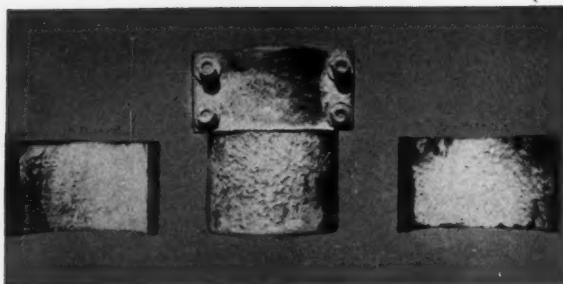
Dust between wearing surfaces is combated in guide bushings by hard-facing
